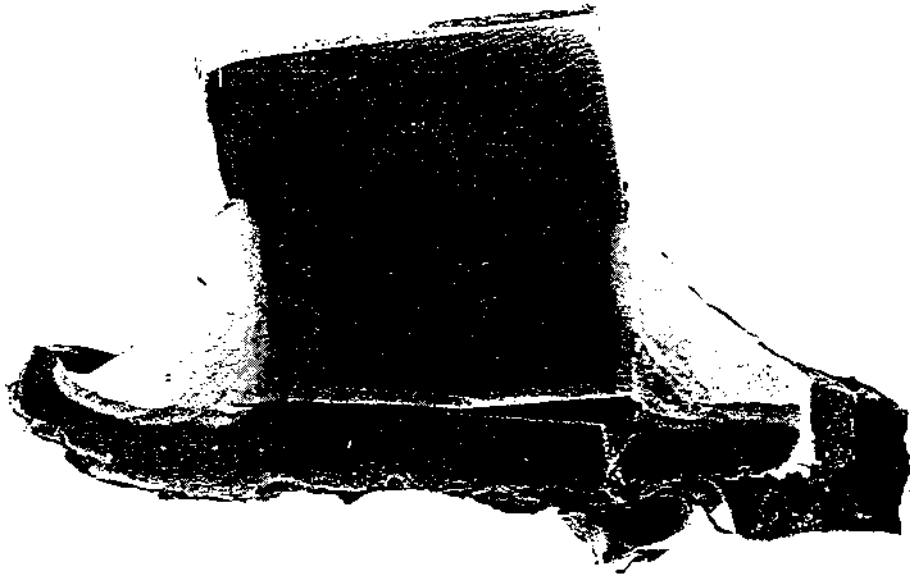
Cross section of side lock specimen marked SL1 (ca 2.5x)
